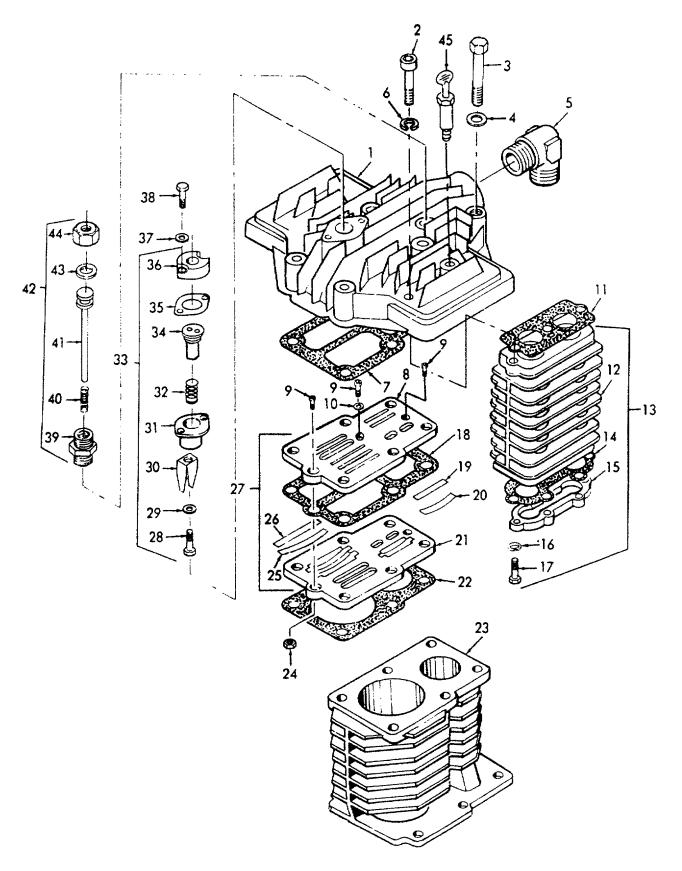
Compressor Valves and Cylinder Head, Disassembly.
